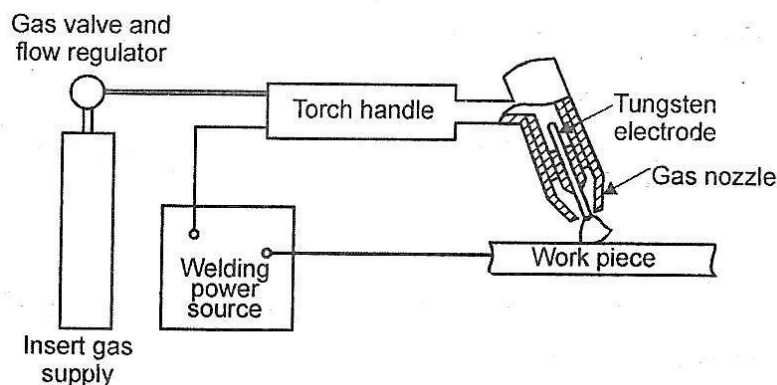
Gas Tungsten Arc Welding Equipment
